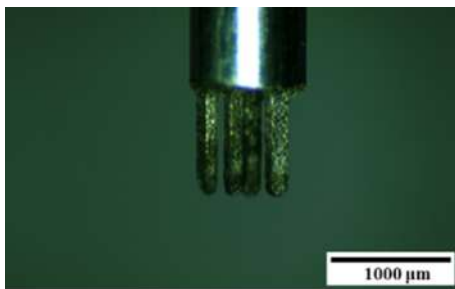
Multi-tool (after being used for CFRP multi-processing)
